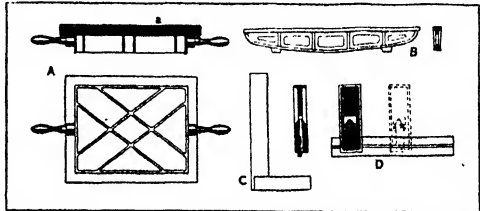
(A) SURFACE PLATE, (a) PROTECTING COVER FOR PLATE WHEN NOT IN USE, (B) LARGE RIBBED STRAIGHT-EDGE, (C) SQUARE; (D) SQUARE WITH ADJUSTABLE BLADE
